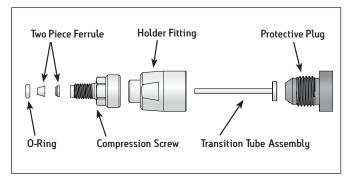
Exploded View of the VanGuard Cartridge Holder.
